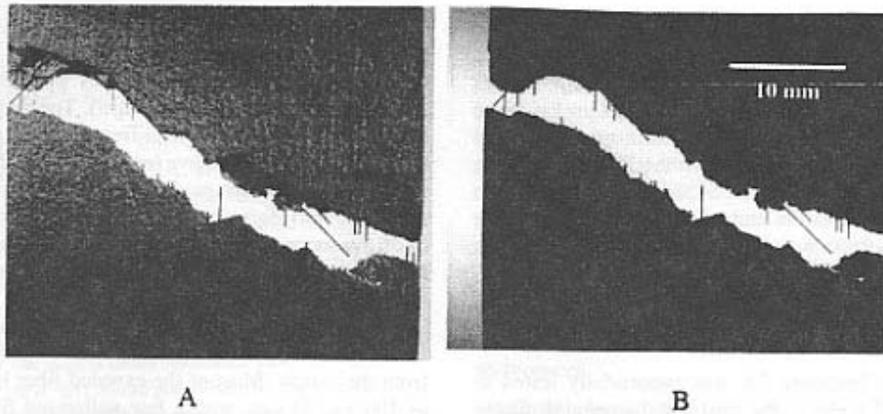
Optical fractograph of Specimen 1074-1 with a 45° initiate fracture plane. Fiber pull-out is predominately the 0° (circumferential) aligned fibers. The shadowgram (Fig. 4B) is shown to emphasize the fiber pull-out length.
